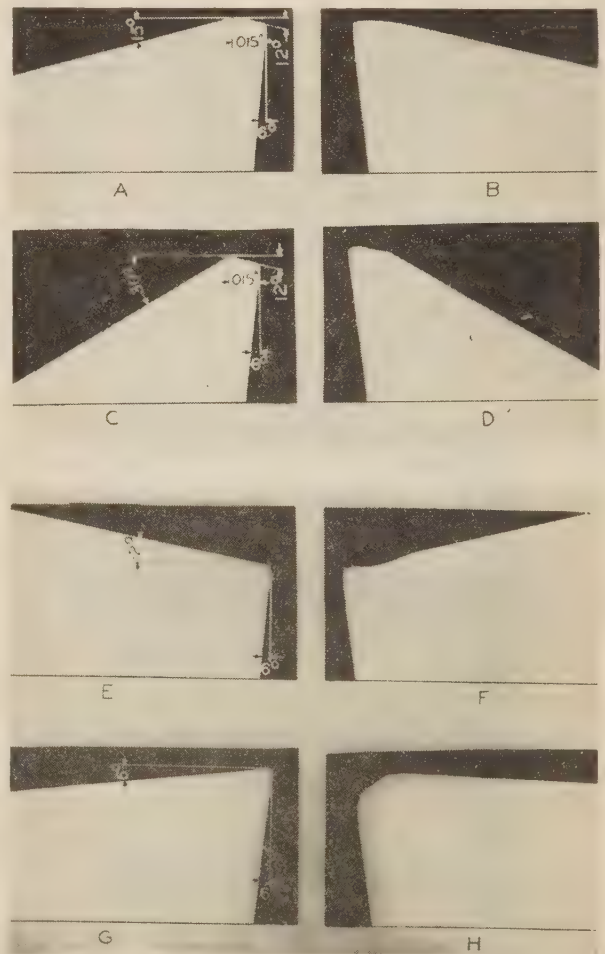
CROSS-SECTIONAL SILHOUETTES OF CARBIDE CUTTING TIPS IN A PLANE NORMAL TO AXIS OF ROTATION BEFORE AND AFTER THEY HAD REMOVED EQUAL AMOUNTS OF METAL
